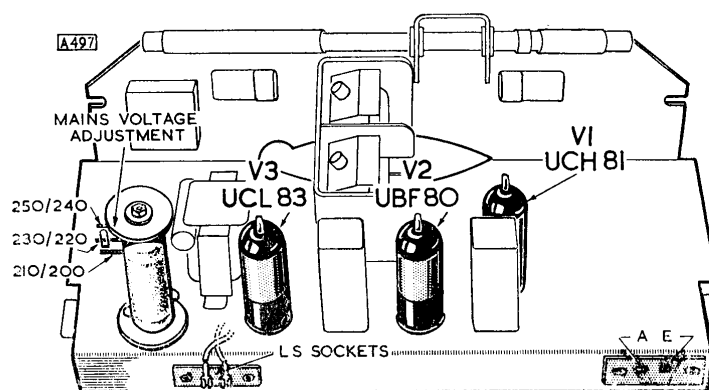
Rear view of receiver chassis, showing locations of valves, etc.
